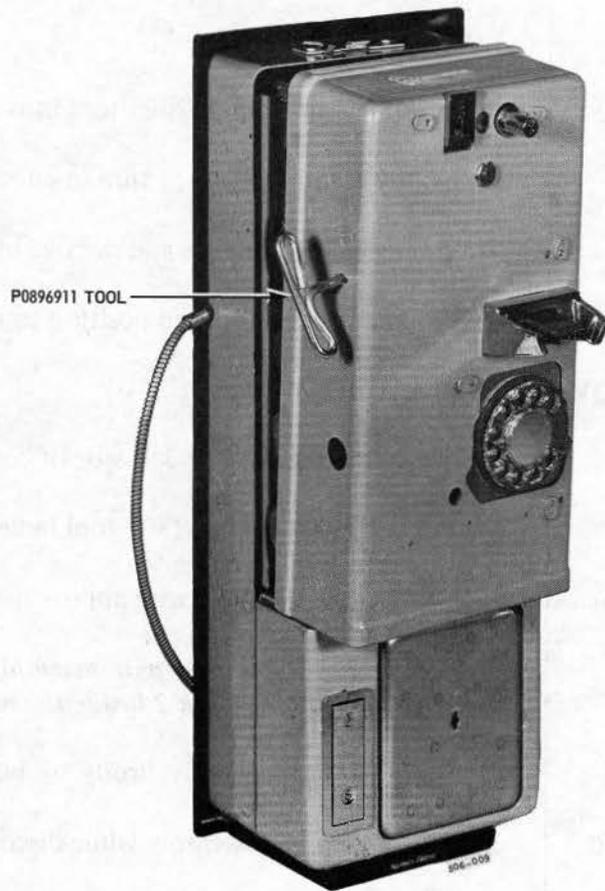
Coin Telephone Set Showing the Location of P0896911 Tool When Unlocking the Cover Unit Assembly
